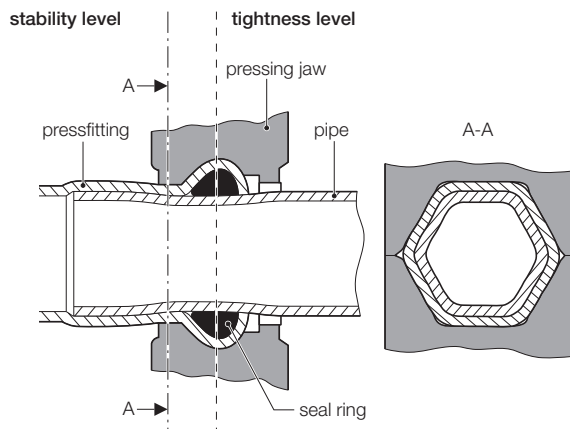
Cross-section of a Mapress press connection with applied pressing jaw d 12 - 35 mm and hexagonal pressing contour
